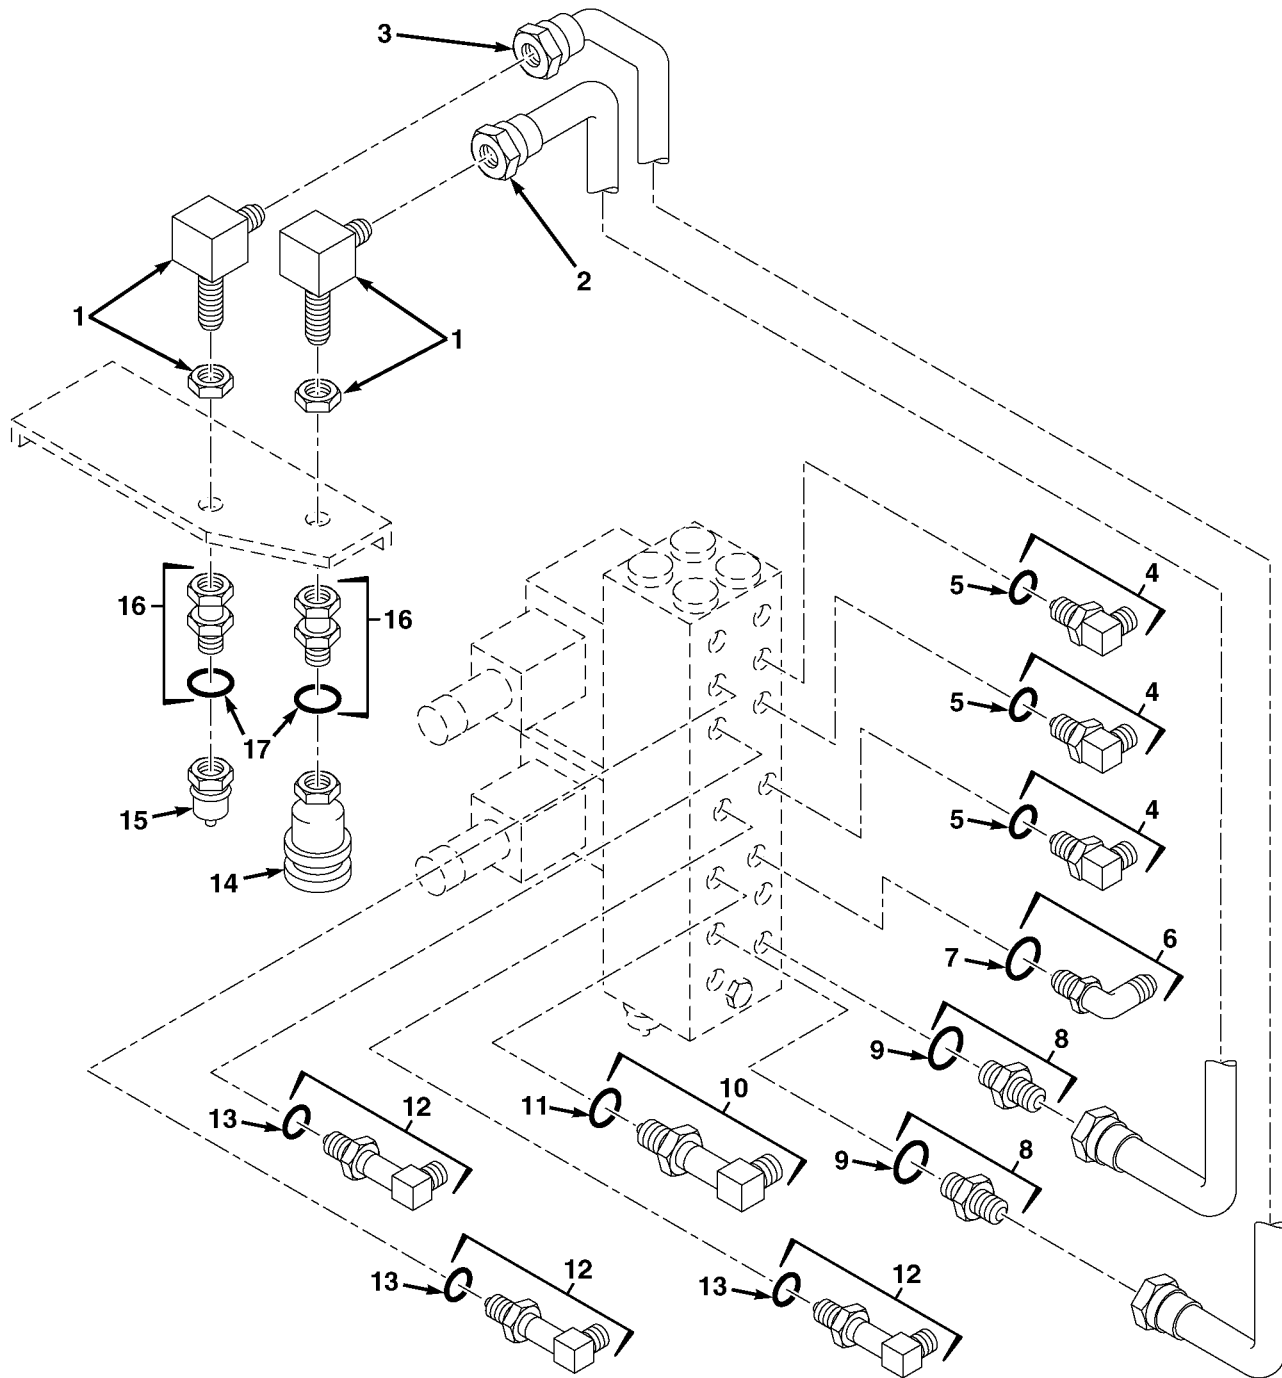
LHS MAIN MANIFOLD FITTINGS AND ADAPTERS
